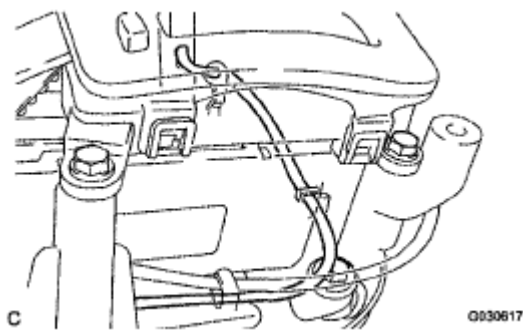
Identifying Wire Harness Of Transmission Control Switch
